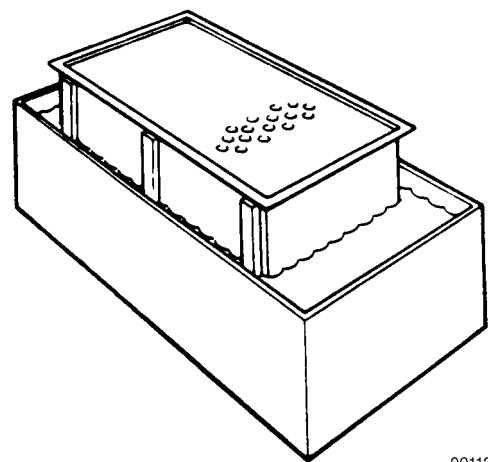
WASHING AND SOAKING THE PRECLEANER SECTION
